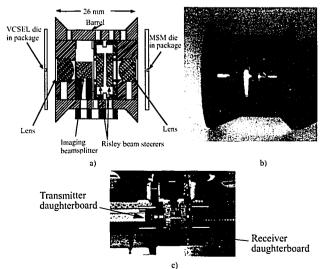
Barrel optomechanics used to position the optics and fasten the transmitter and receiver daughterboards.
